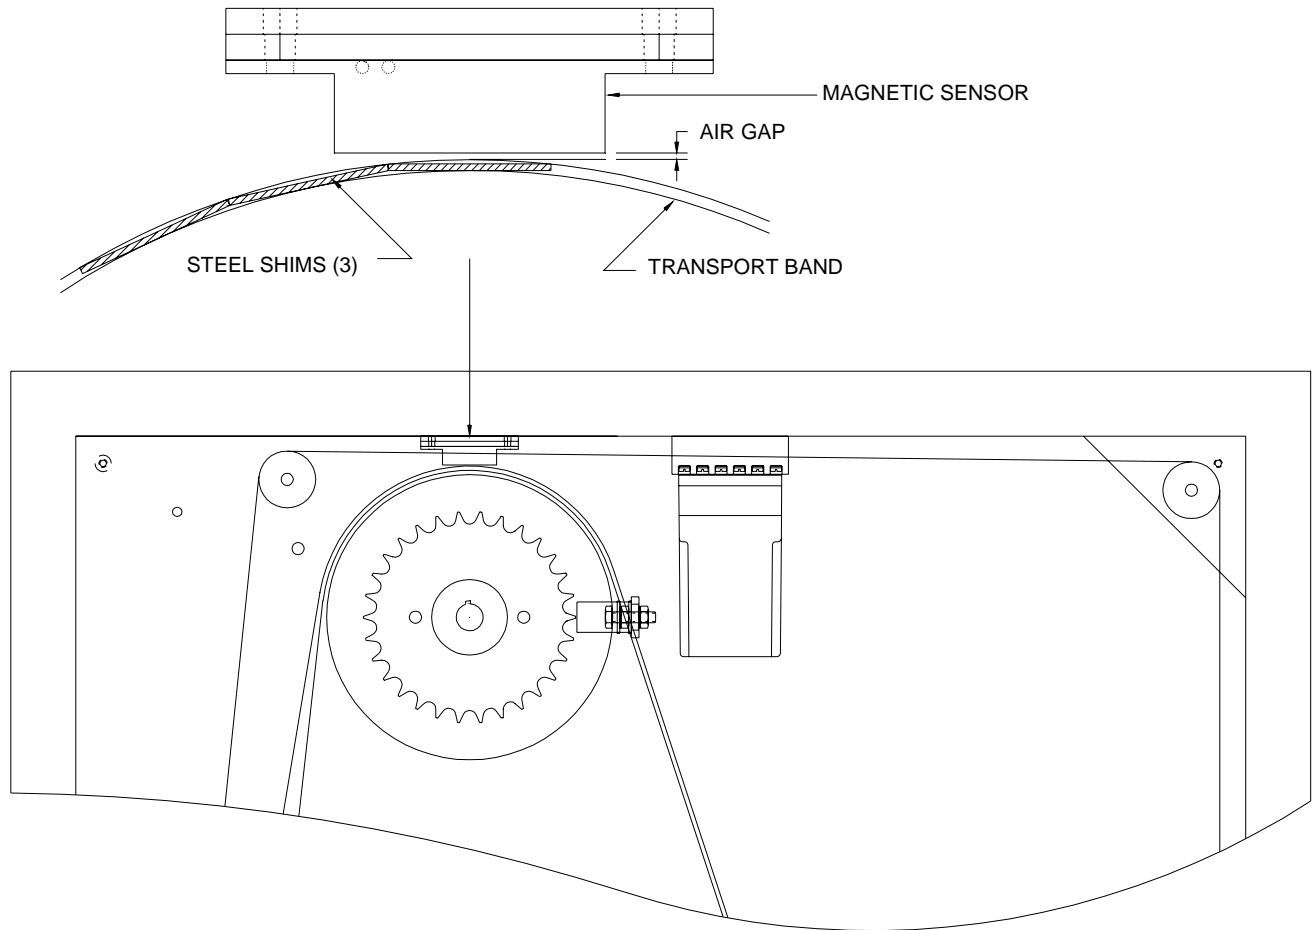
a. Checking and Adjusting the Magnetic Sensor
